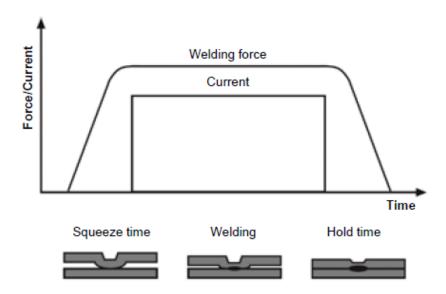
The principle of projection welding. (*Ruukki*, 2009)
